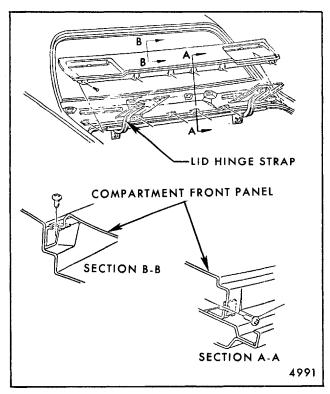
Rear Compartment Front Panel - Oldsmobile E Style
